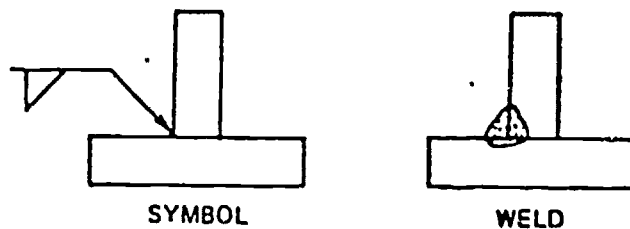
Application of Fillet Weld Symbol - Near Side
